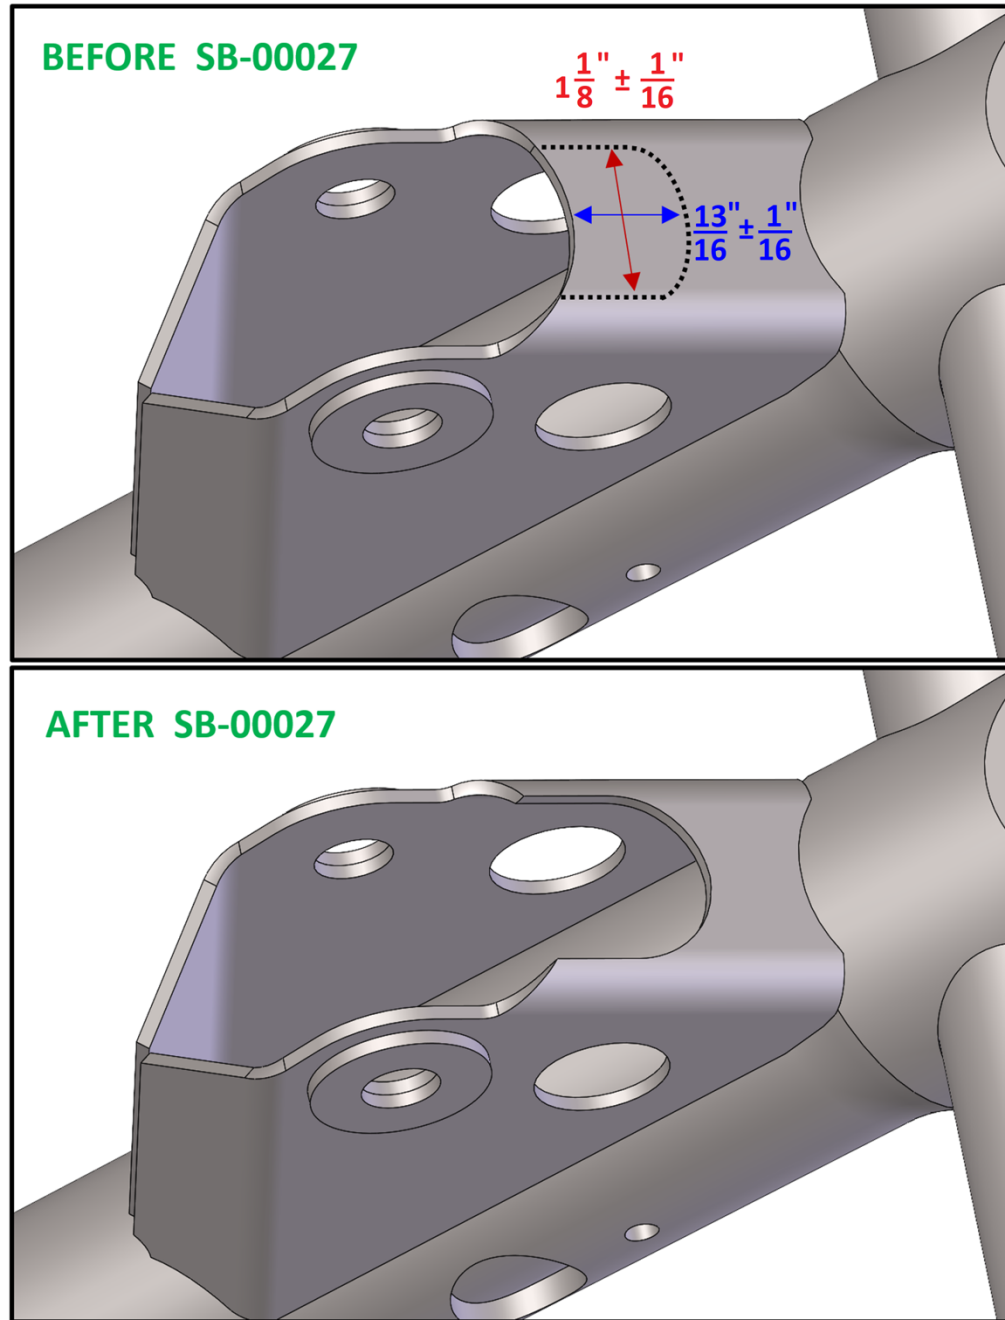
ENLARGING THE OPENING ON U-01406.
